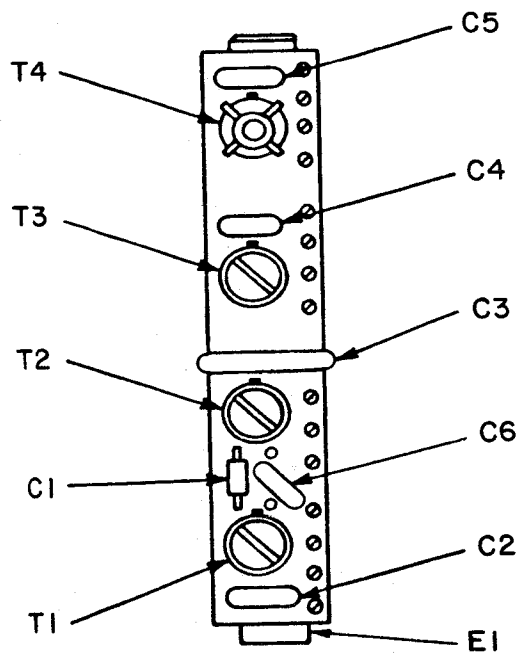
3 MHz Subassembly A2A4A21, Component Locations
